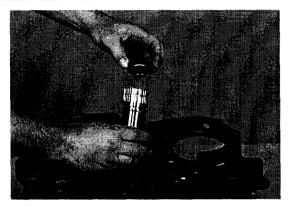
If support bushing or bearing is to be replaced, remove from stator support.
